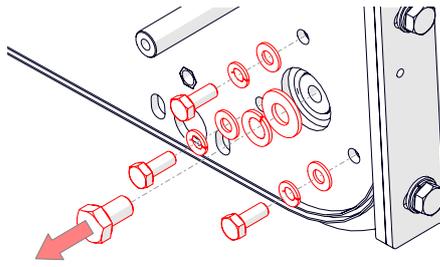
L - Remove bolts from RH cylinder bearing, and central shaft
